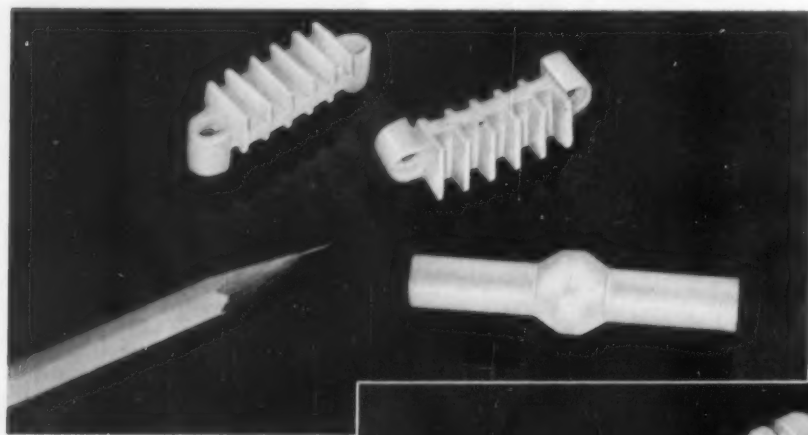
(left)—Complex terminal blocks (upper part of photo) are molded of Teflon; simple bushing (lower right-hand part of photo), required only in small quantity, is economically machined from Teflon rod
